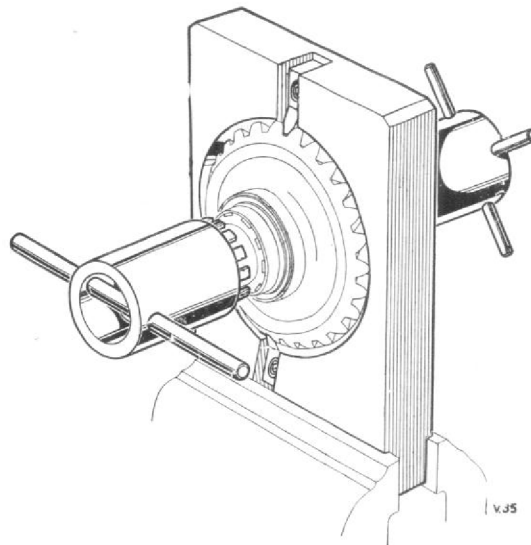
Vice block T.74910 and spanner T.74911, for removing ring nut from horizontal drive shaft.
